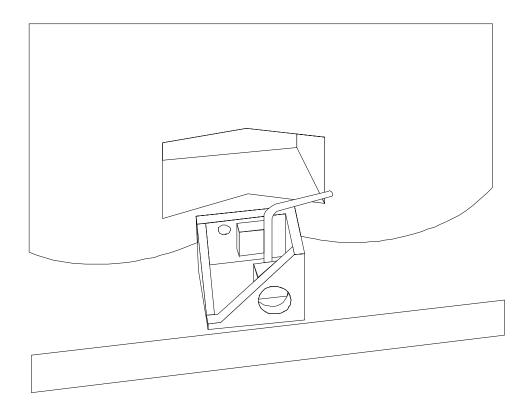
REMOVAL OF FEMUR BALL AND FLANGE ASSEMBLY
